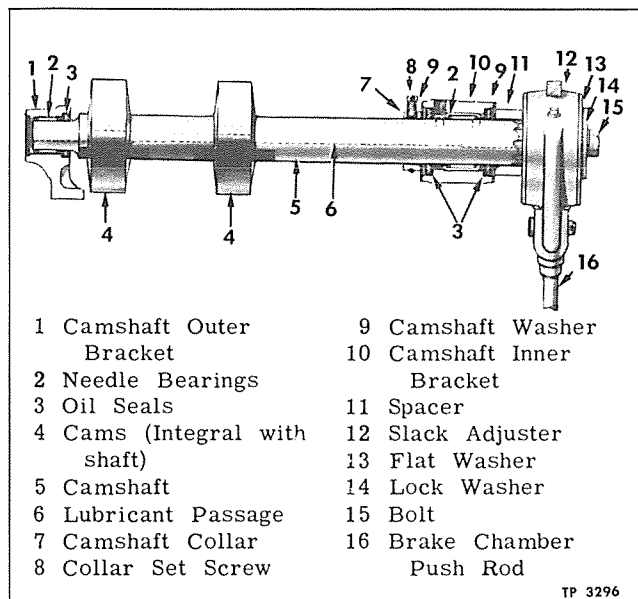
Rear Camshaft and Slack Adjuster Mounting (Early Vehicles)
